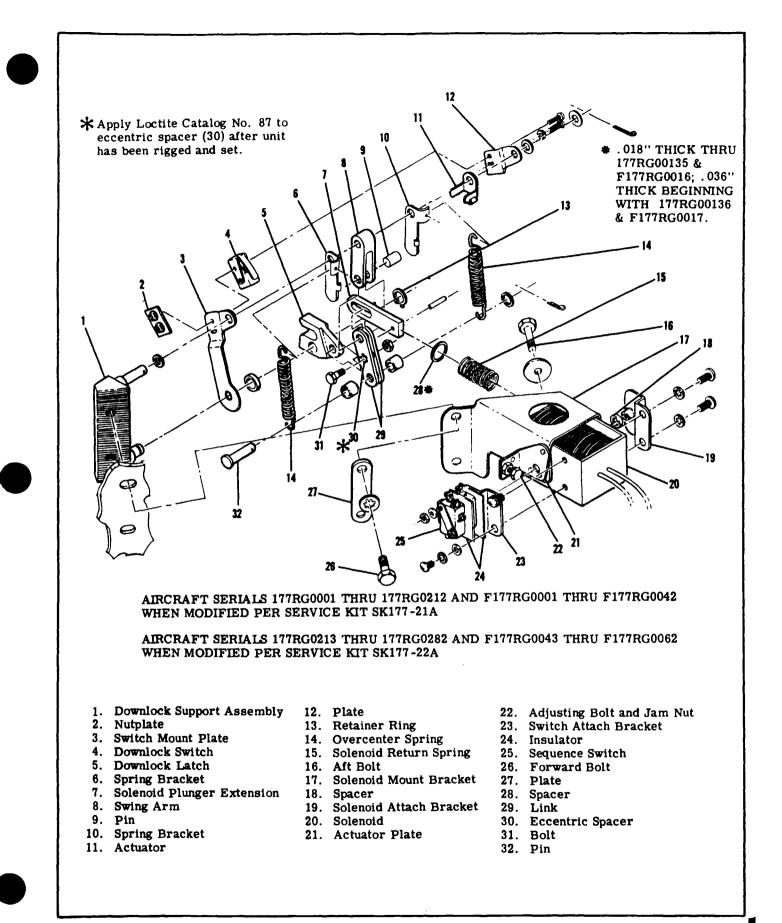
Main Landing Gear Downlock Assembly (Sheet 1 of 3)
